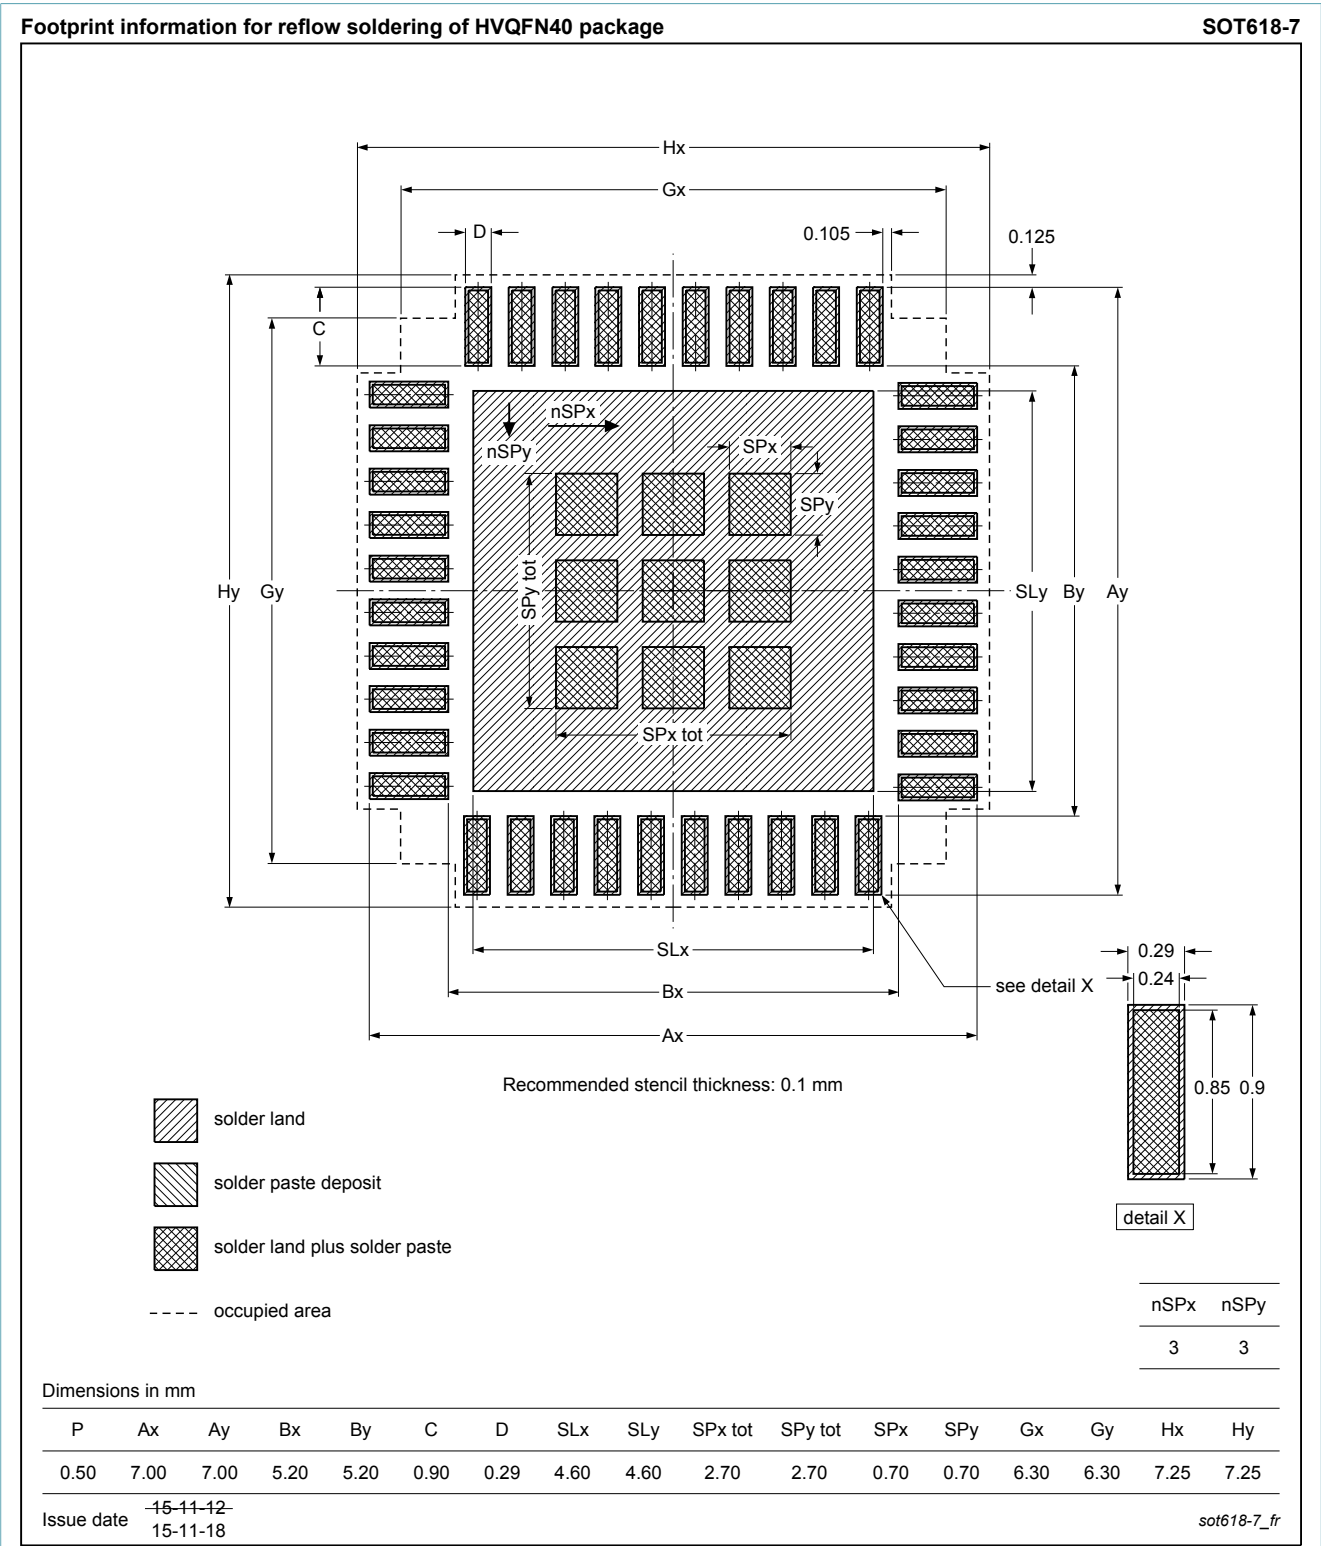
Reflow soldering footprint for HVQFN40 (SOT618-7)
